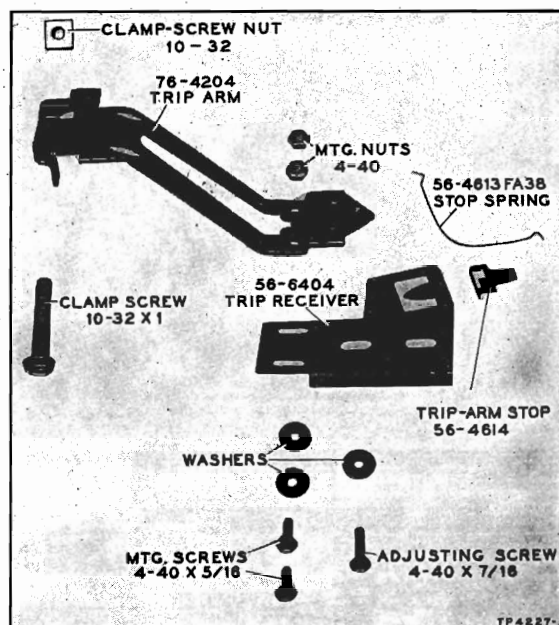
Trip-Arm and Trip-Receiver Assemblies
